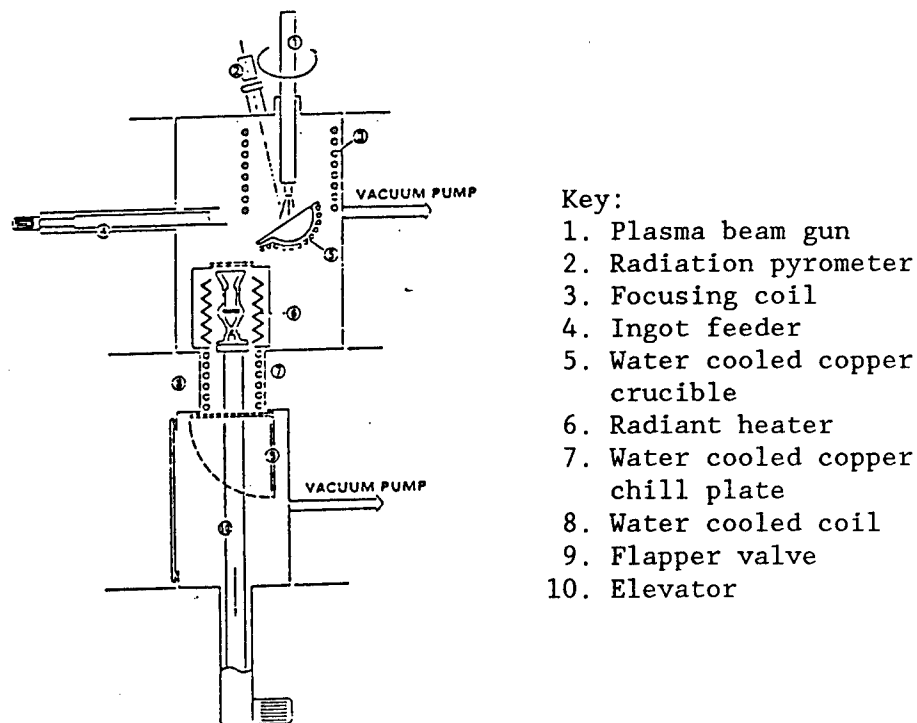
Schematic Structure of IHI-MIZUHO Single-Crystal Casting Unit
